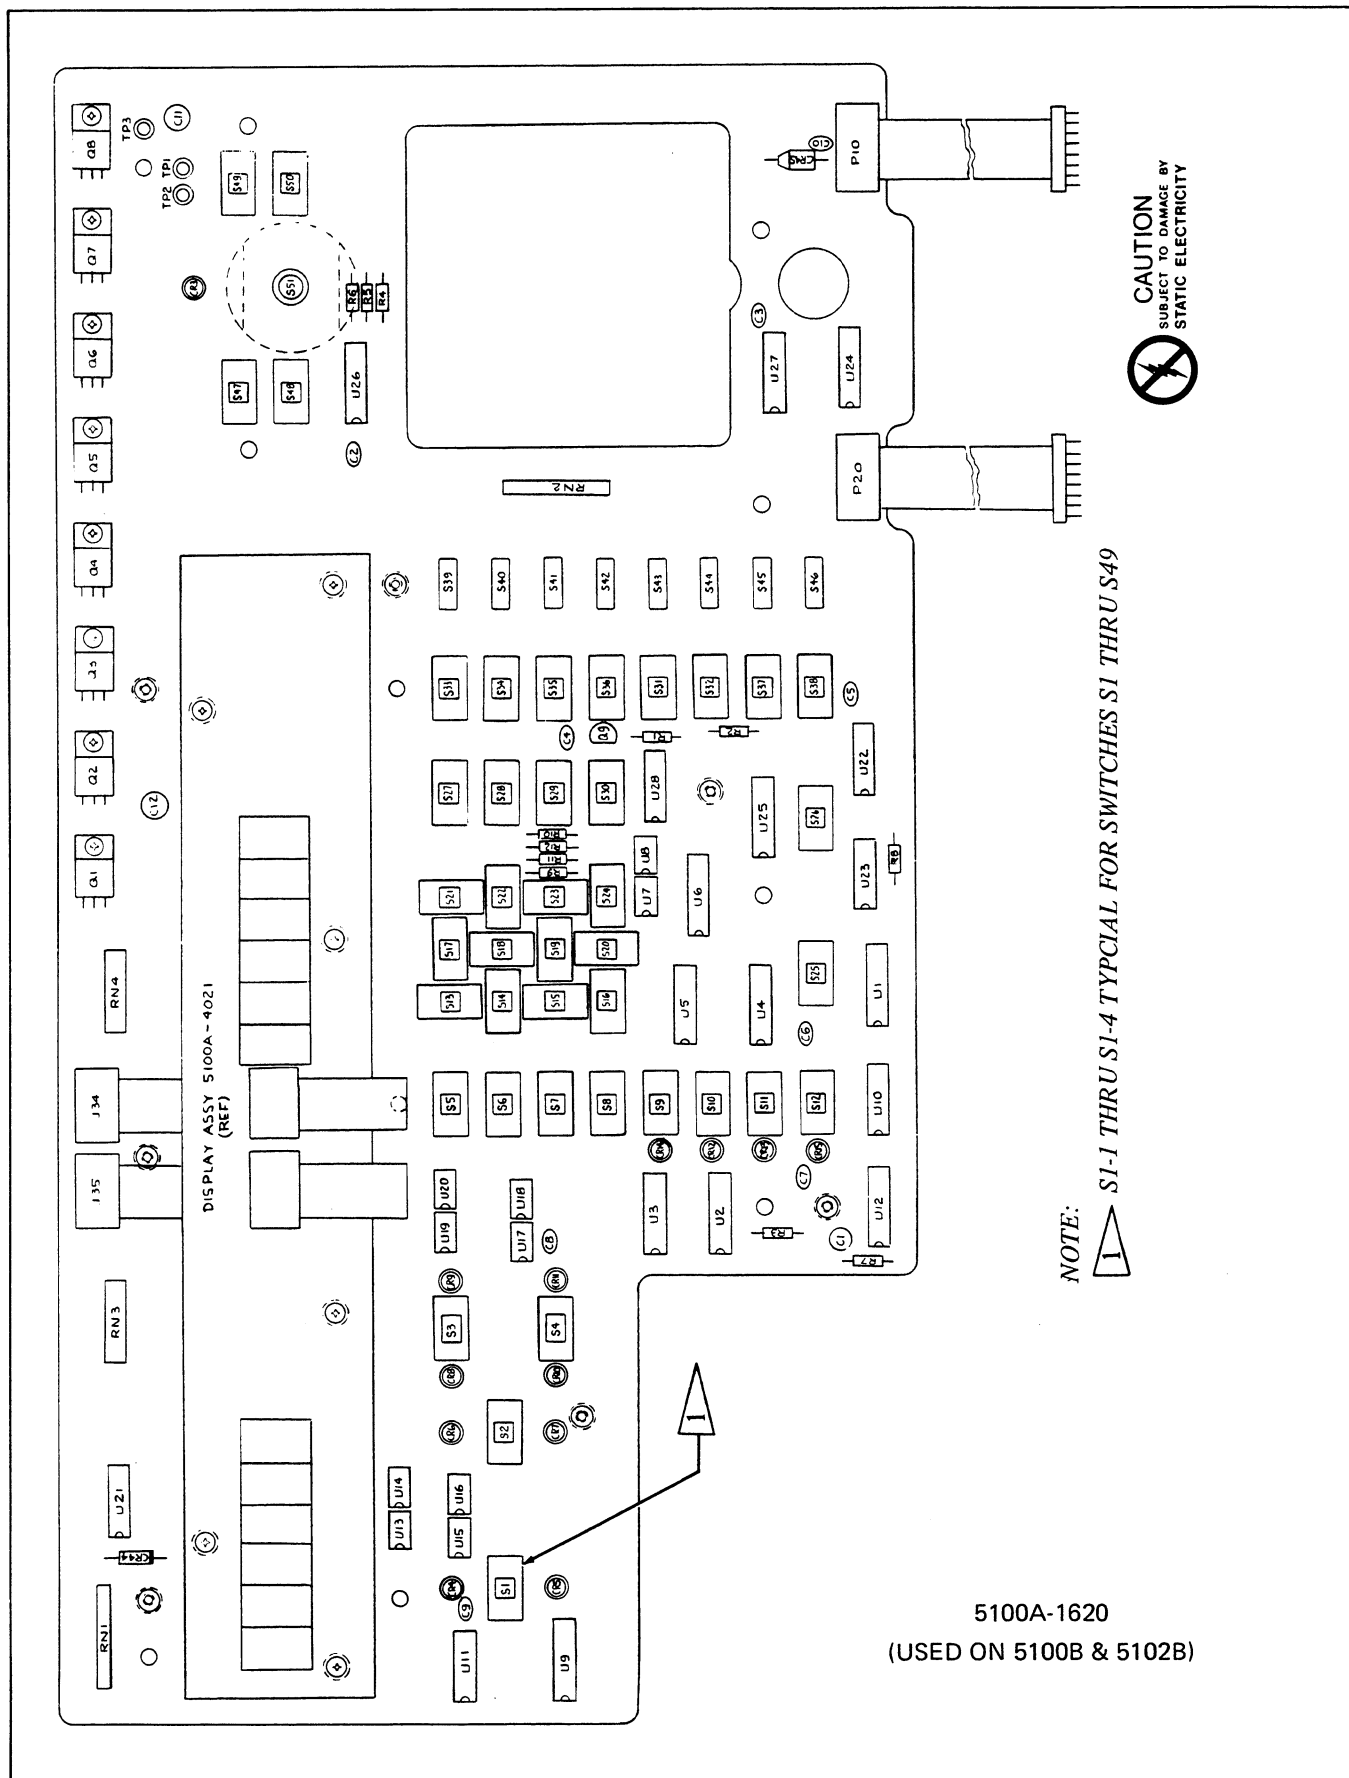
A10 Front Panel PCB Assembly, Non-Storage
